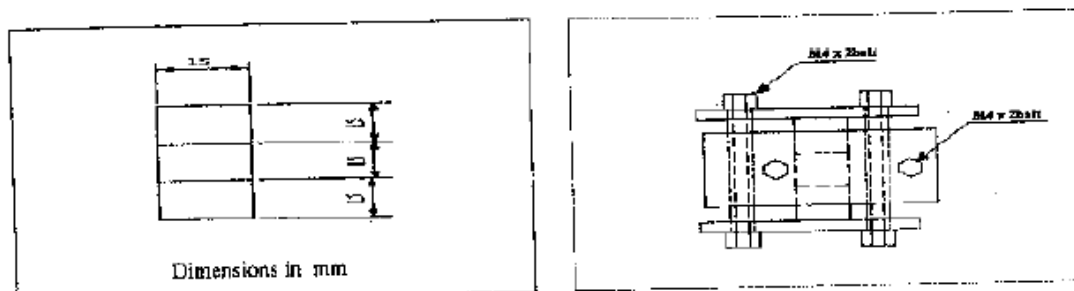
a- The joint design and the dimensions of double butt joint b- The fixture of the double butt joint
